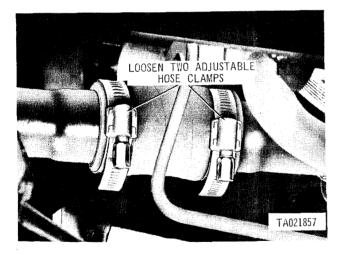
Loosening or tightening oil filter upper and lower tube and tube hose conntection,model AVDS-1790-2C and AVDS-1790-2D engines.
